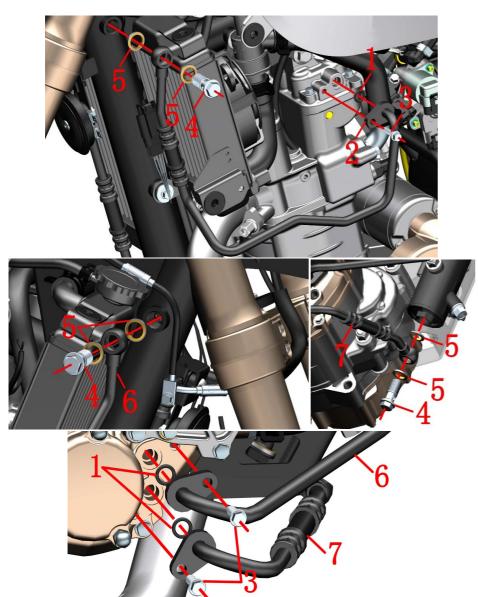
COOLING SYSTEM COMPONENT		Radiator tubing component	СНК	(0)
